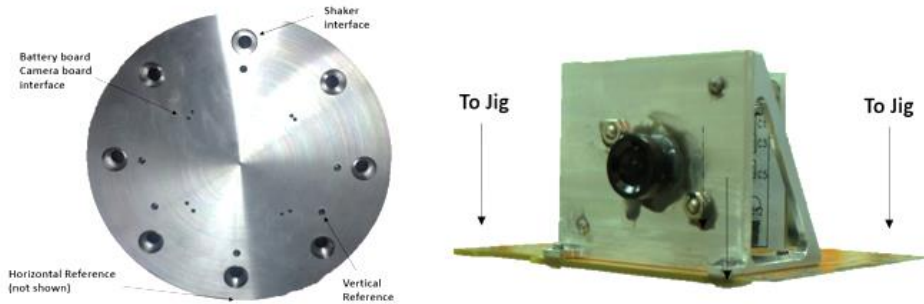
Jig (L) with how IFCAM was fixed to the Jig (R)
